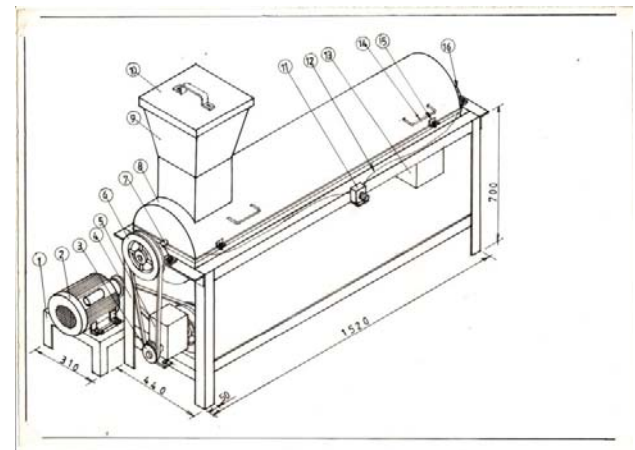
Isometric View of the Roasting Machine: 1-Electric motor stand, 2-Electric motor, 3-Speed reduction pulley, 4-Machine stand, 5-Speed reduction box, Machine pulley, 7-Conveyor shaft, 8-Roasting drum, 9-Feeding hopper, 10-Hopper lid, 11-Thermostat, 12-Thermocouple wire, 13-Kernel outlet, 14-Drum handle, 15-Drum flange, 16-Bearing housing
